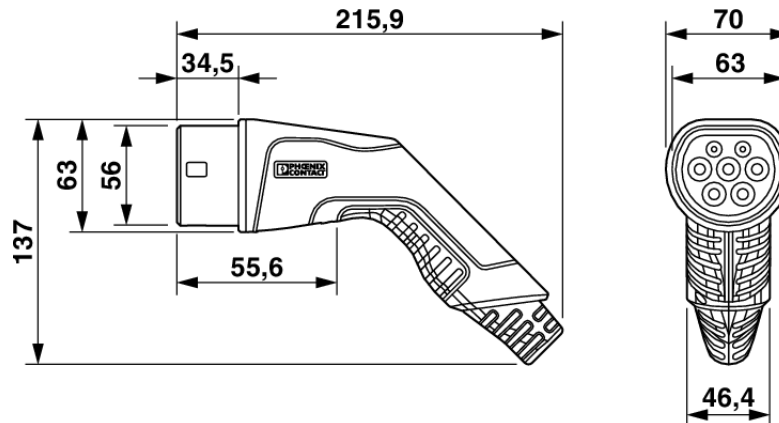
Vehicle Connector of the charging cable - view of front and side
